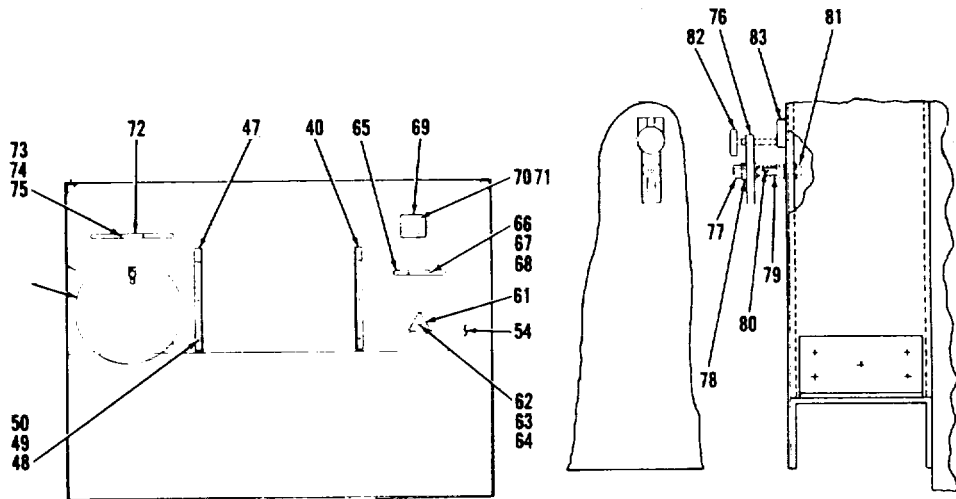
(1). U7622 chassis assembly (sheet 1 of 5).
